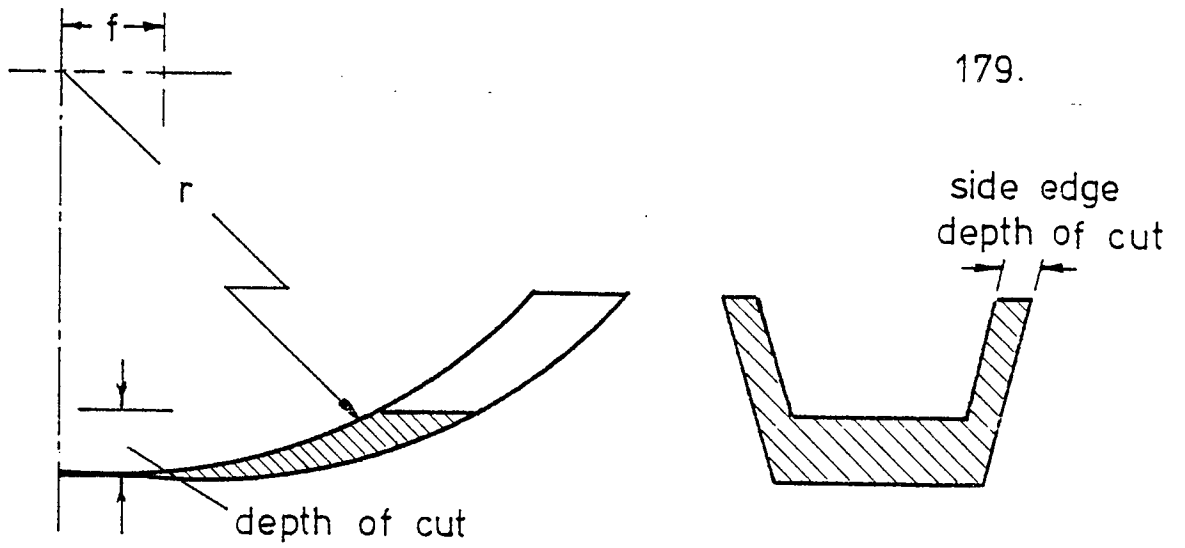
DEPTH OF CUT FOR SIDE CUTTING EDGE
